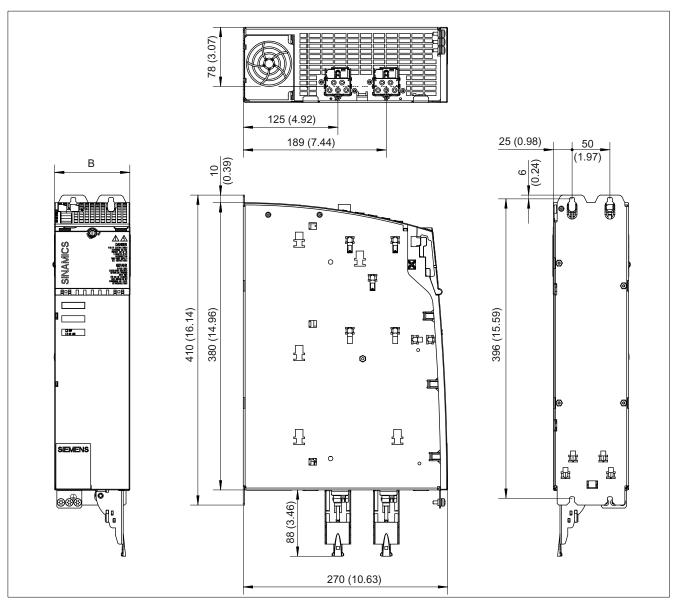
Dimension drawing of Motor Module Booksize with internal air cooling 30 A and 2 x 18 A, all dimensions in mm and (inches); example: Double Motor Module 2 x 18 A
